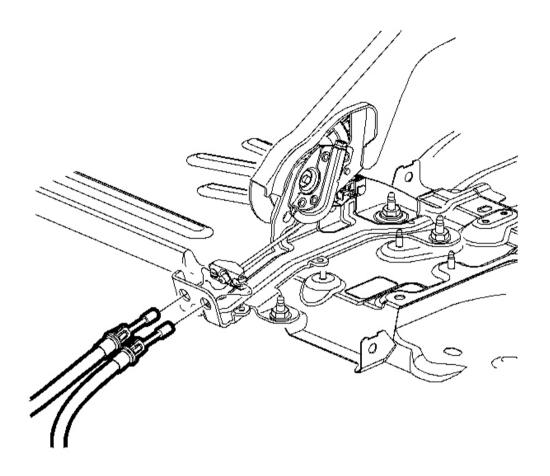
Installing Cable Ends To Cable Equalizer Courtesy of GENERAL MOTORS CORP.
